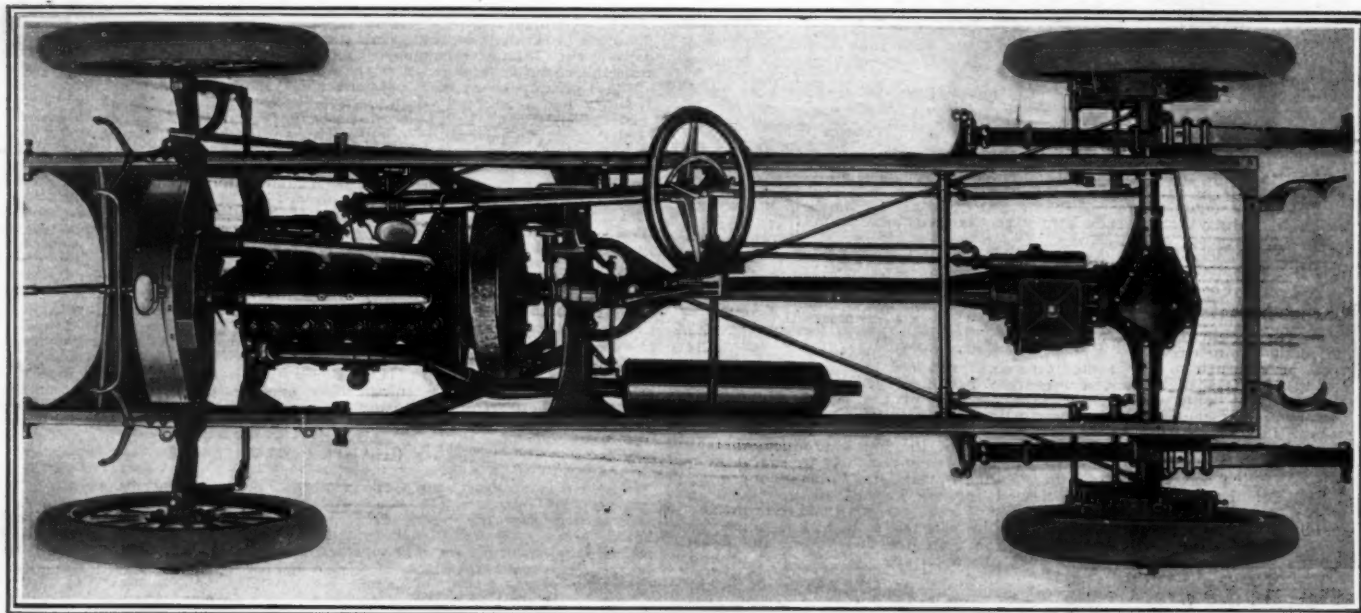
Model 61 Overland chassis for 1912. The motor on this chassis, like all other Overland types, has cylinders cast separately and cooled by thermo-syphon circulation. The motor also has a circulating oiling system and the valve springs are enclosed and provided with packing to prevent the leakage of oil. This chassis has the new lever working in a single slot
